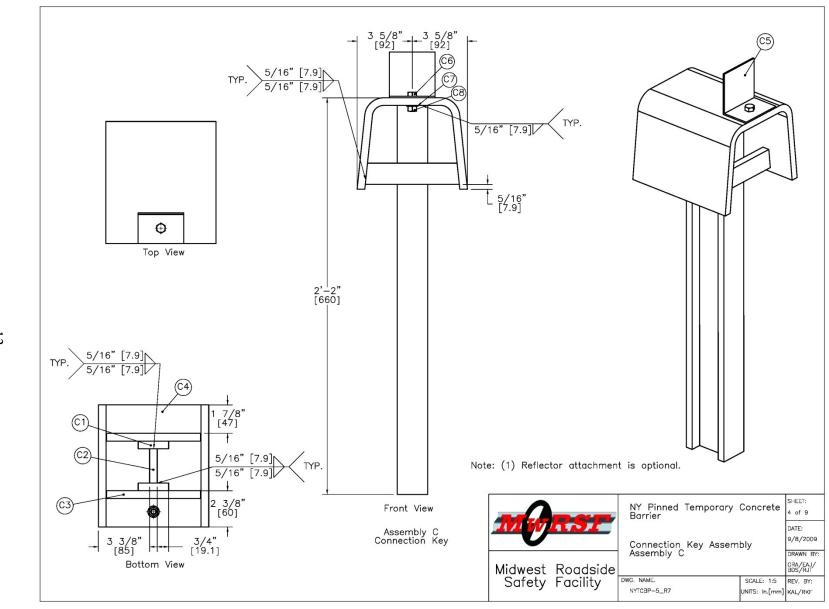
Connection Key Assembly Details, Test No. NYTCB-5
